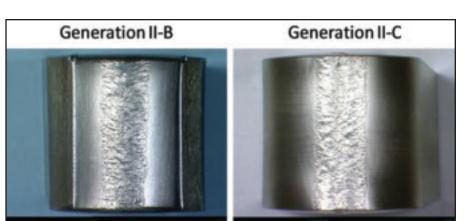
Bend test specimens that passed AWS guide bend testing requirements.
